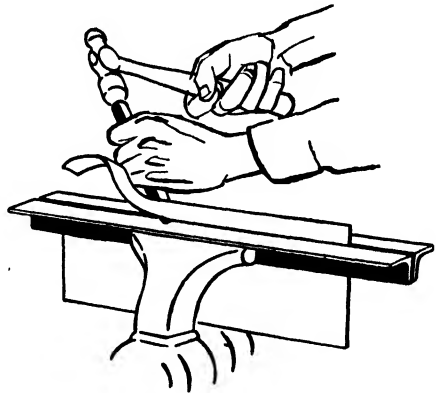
A good way to cut heavy sheet metal with a cold chisel. Use a sharp chisel and keep the bevel of the chisel flat against the angle iron (see also Fig. 12-5).
